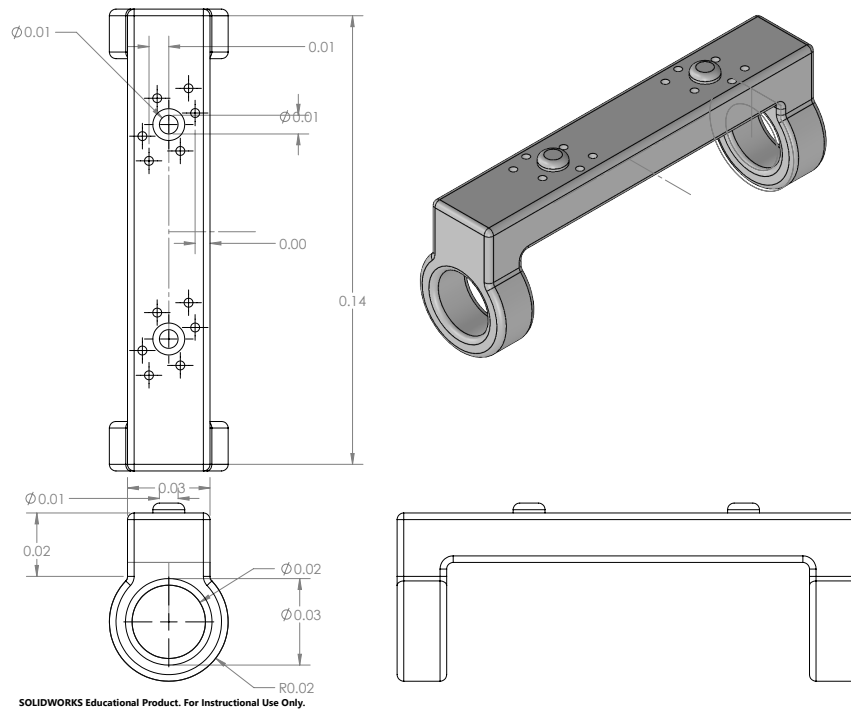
Main Torso Servo Attachment Point. All dimensions in inches
